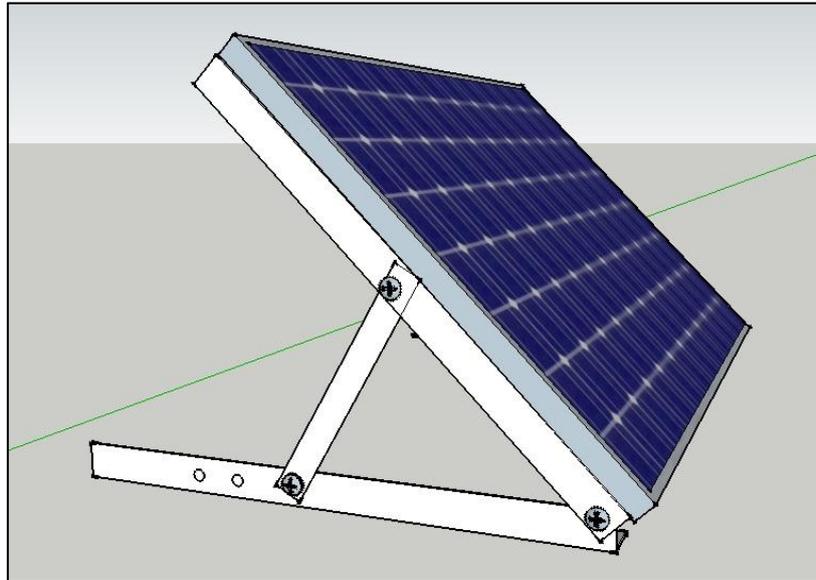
Fixed Angled Solar Panel 3D drawing from the left side
